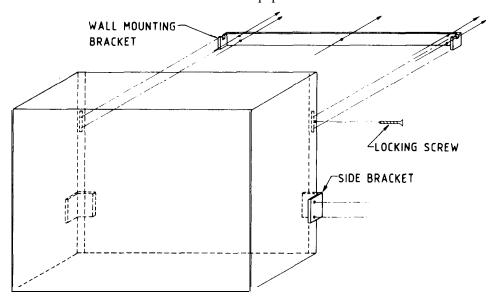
(c) WALL MOUNTING OF MAIN EQUIPMENT CABINET
